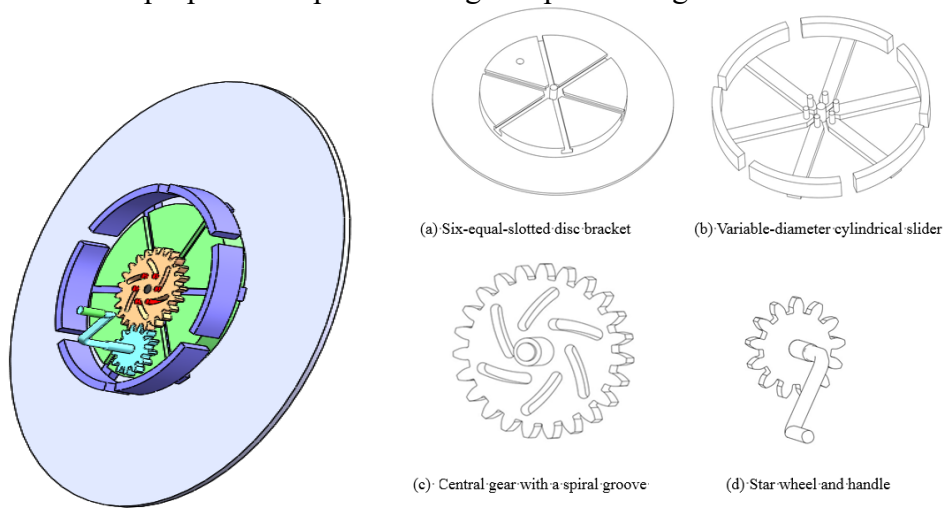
Variable-Diameter Female Head Positioning Tool and Parts
